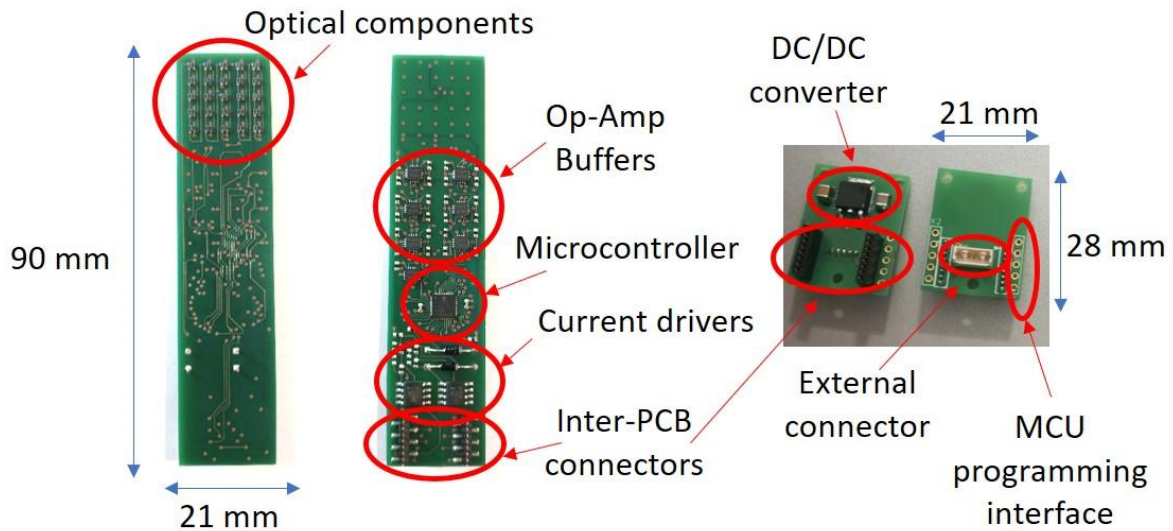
Manufactured PCBs: sensing board (left) and power supply board (right).
